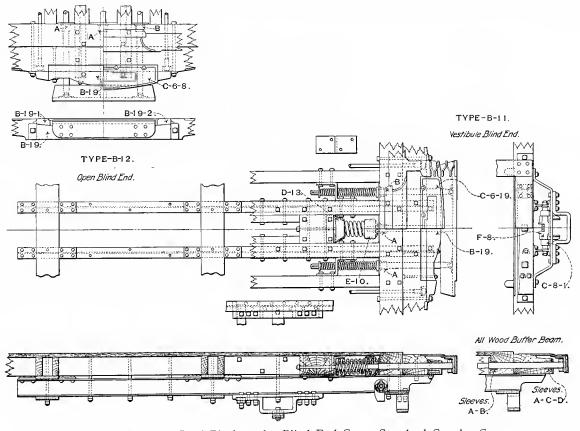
Standard Steel Platform for Blind End Cars. Standard Coupler Company.
